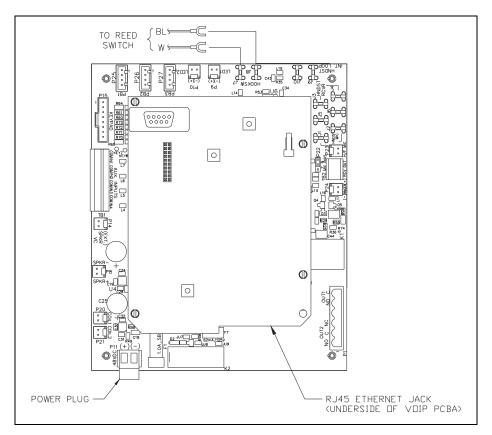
VoIP Carrier and Circuit PCBAs (for Models 246-700 and 256-700 using the 69841 PCBA)
